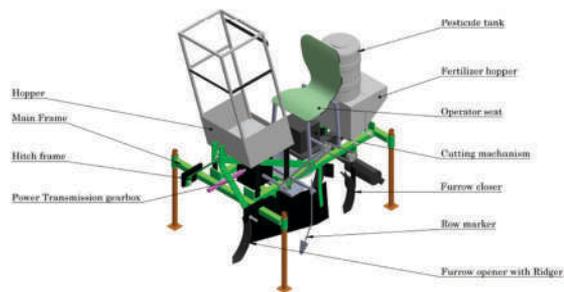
CAD drawing of mini tractor operated sugarcane sett cutter planter
